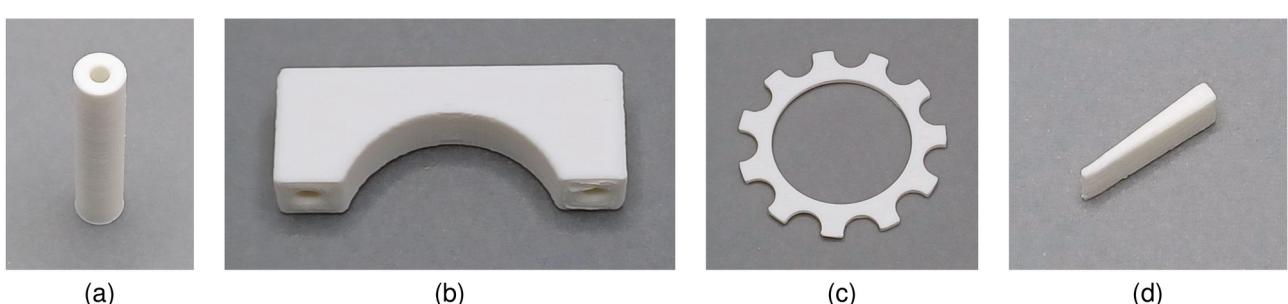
Smaller parts. (a) Connector. (b) Clamp. (c) Bearing cage. (d) Wedge.
